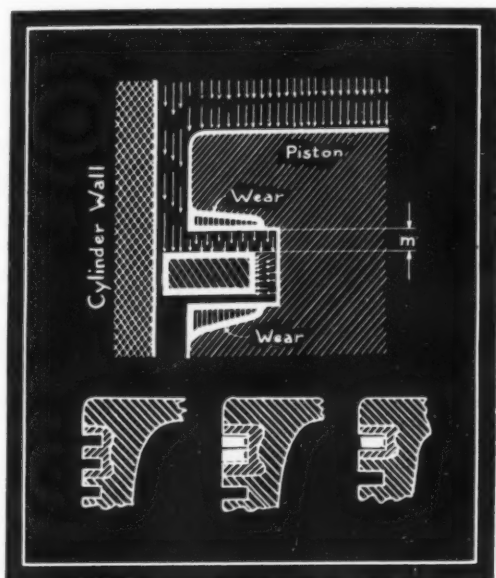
Nickel iron piston ring carriers solve wear and compression problem
